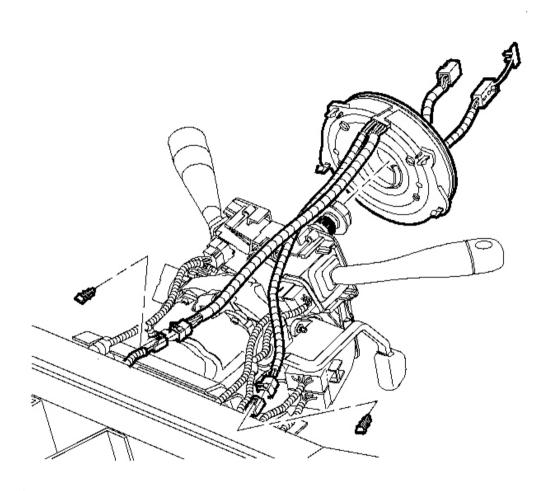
SIR Coil Harness Clips, Bracket & Horn/Cruise Connectors Courtesy of GENERAL MOTORS CORP.
